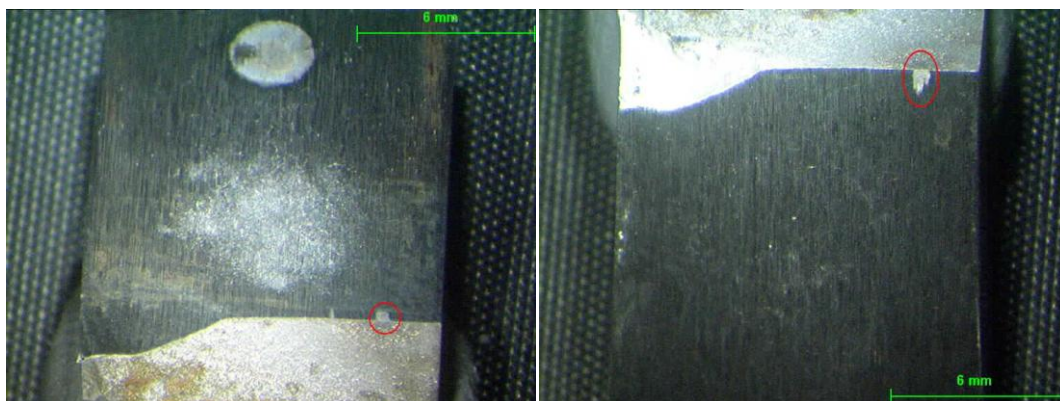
MLX17 specimen - Corrosion flaw which initiated fatigue crack
